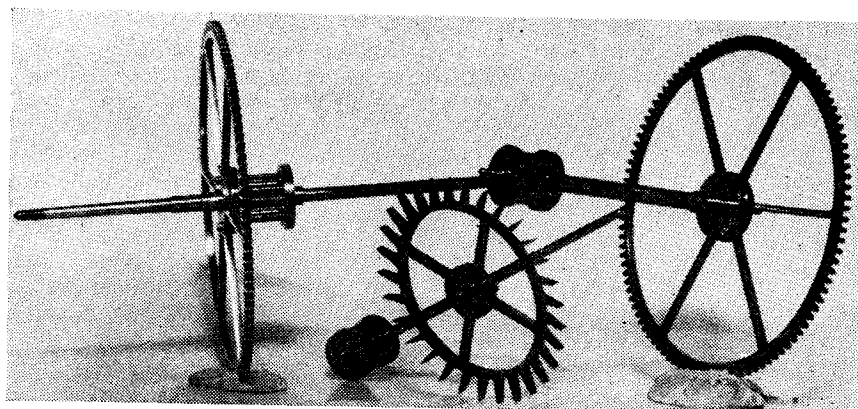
, Nos 1 and 2. The pinion arbor is machined in the same way as the centre arbor; the pinion head in this case is fitted to the end of the pinion arbor and has a cap fitted to the outer side of the bobbin to retain the rounds in position. The wheel is mounted on a collet at the opposite end of the pinion head. This collet for fixing the third wheel should next be made; it can be roughed out from a piece of $\frac{1}{2}$ in. round brass rod in the self-centring chuck, the hole drilled for a press fit, taper fit or a soft soldered fit to the pinion arbor. The seating to fit the wheel must be turned after the collet has been fixed to the pivot arbor, as in the case of the centre wheel it is secured to the collet with three 14 BA screws.
